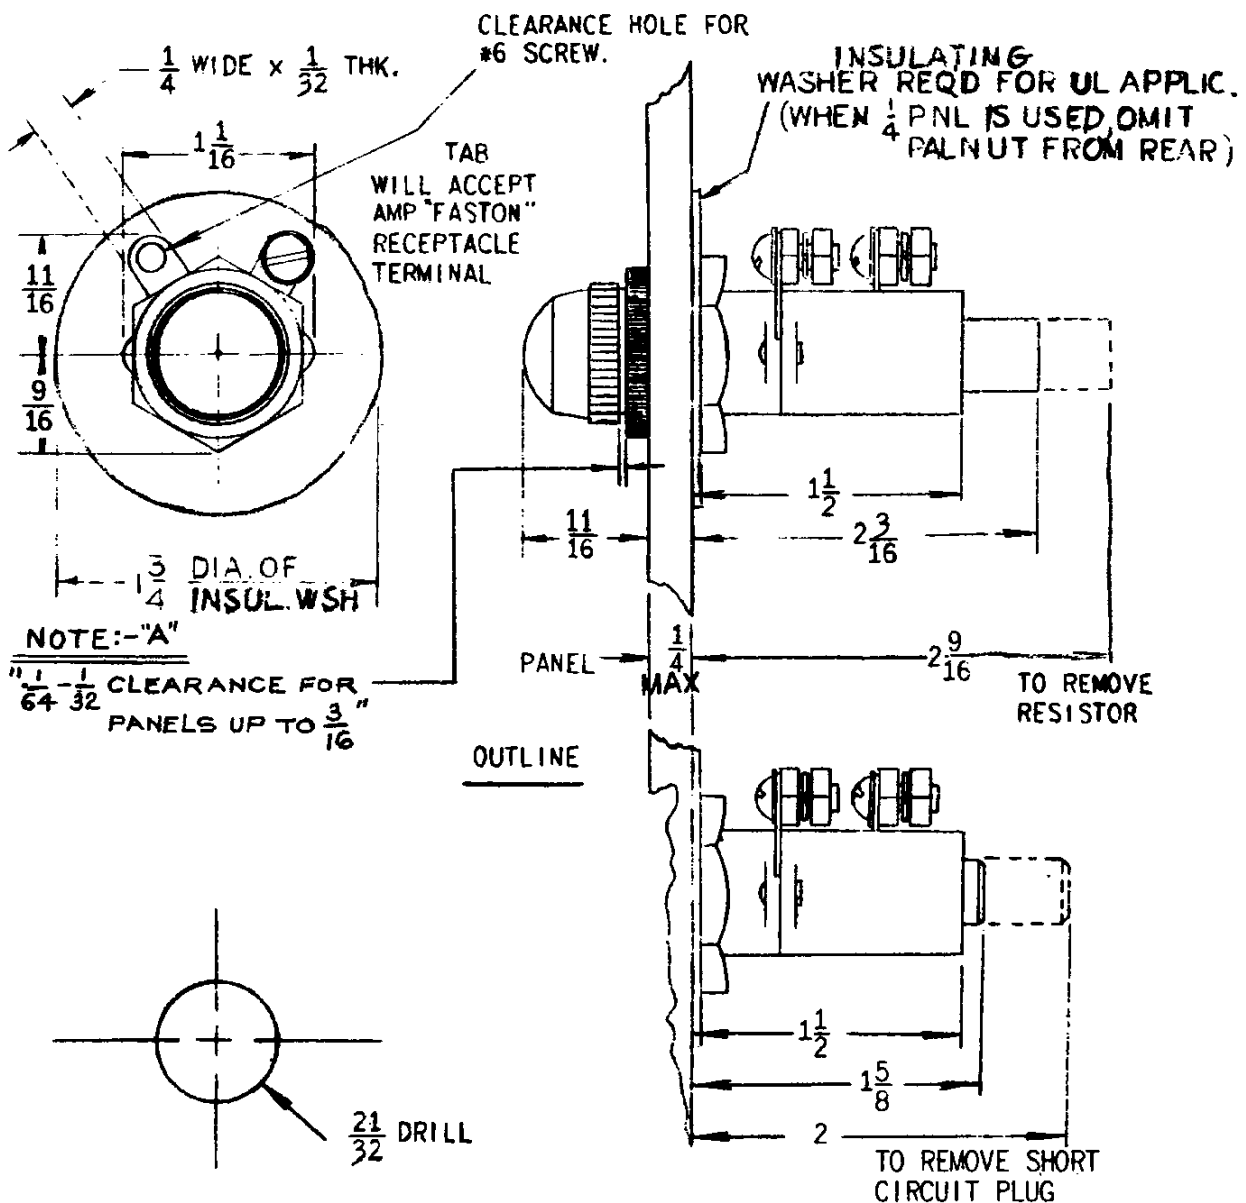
(0165A7859-6) Outline And Panel Drilling For Type ET-16 Indicating Lamp
